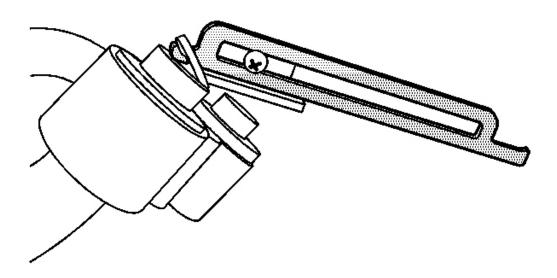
View Of Universal Removal Tool Courtesy of GENERAL MOTORS CORP.
